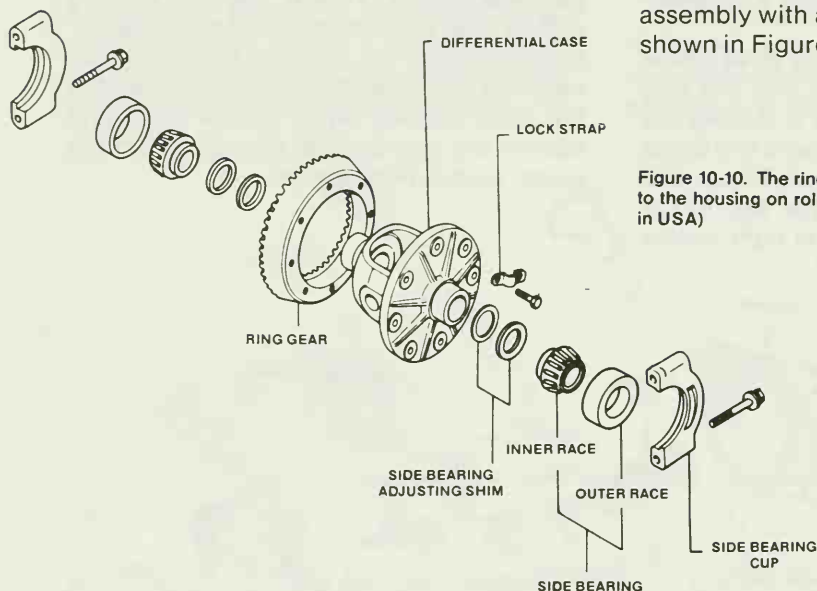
The ring gear and differential case are mounted to the housing on roller bearings. (Nissan Motor Corporation in USA)
